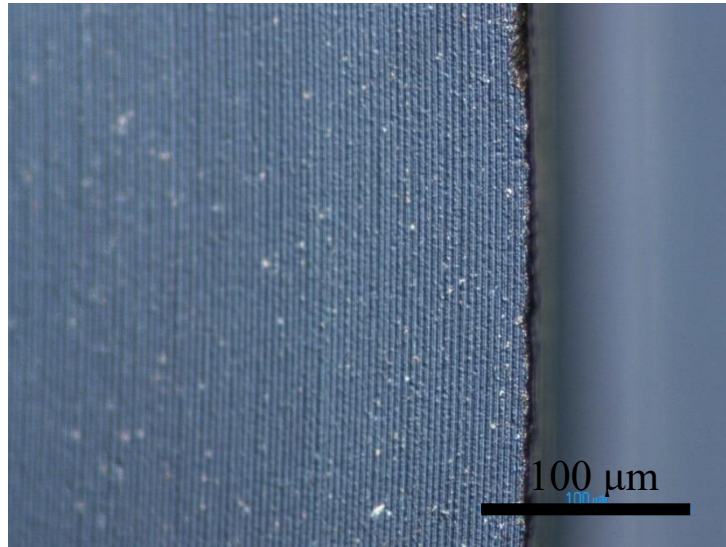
Nomarski photograph of improved Fresnel edge.
